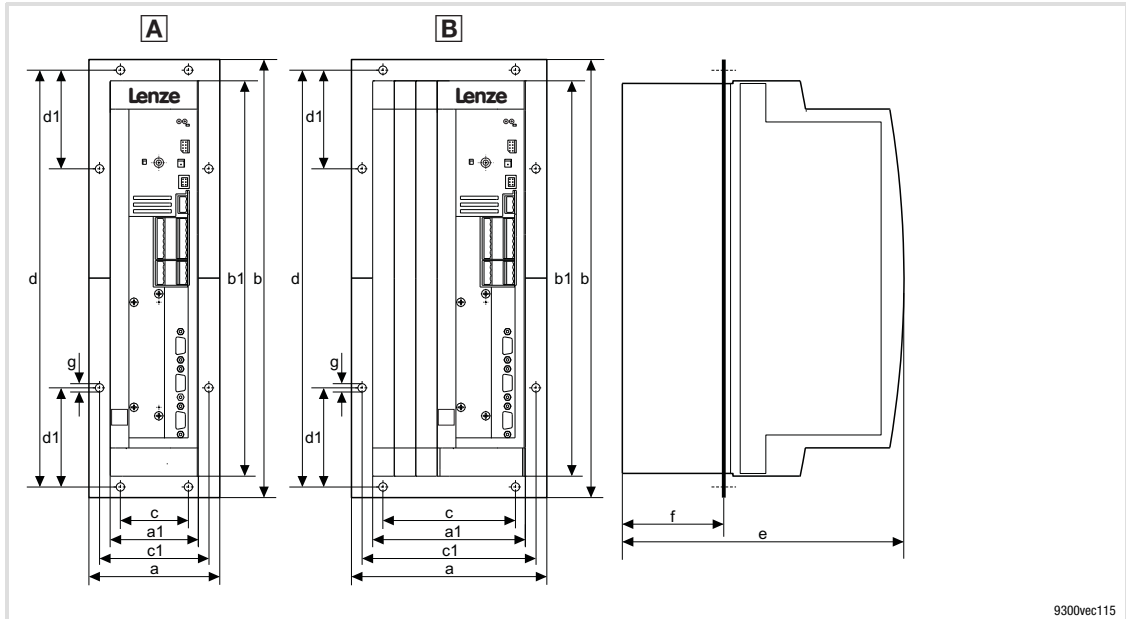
Dimensions for thermally separated mounting 0.37 ... 11 kW
